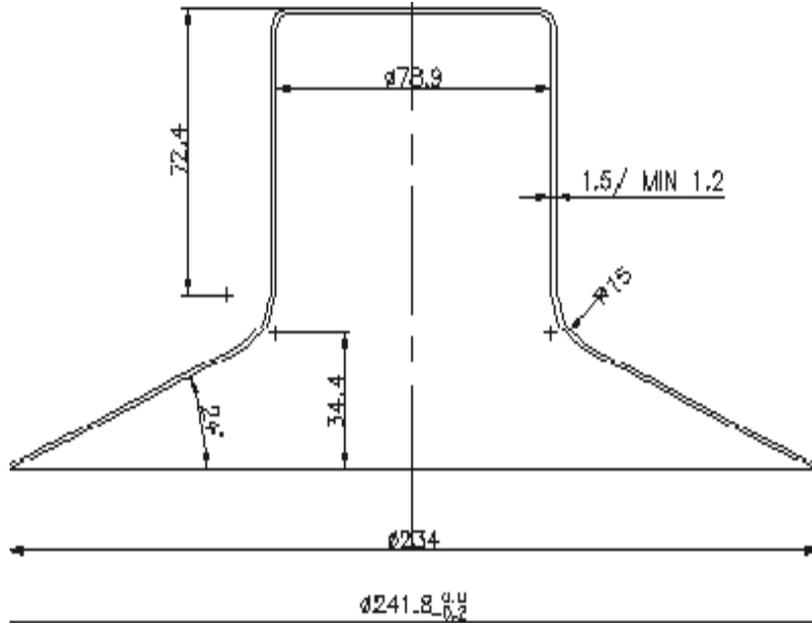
Example component (dimensions in mm, sheet material M.S., sheet thickness: 1.5 mm)
